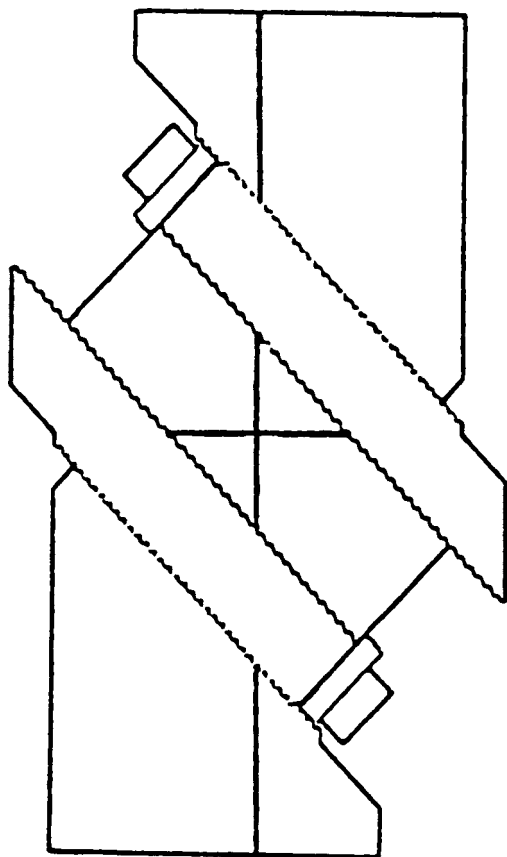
Proper Positioning of Test Specimen and Shear Jaws on Angle Supports
